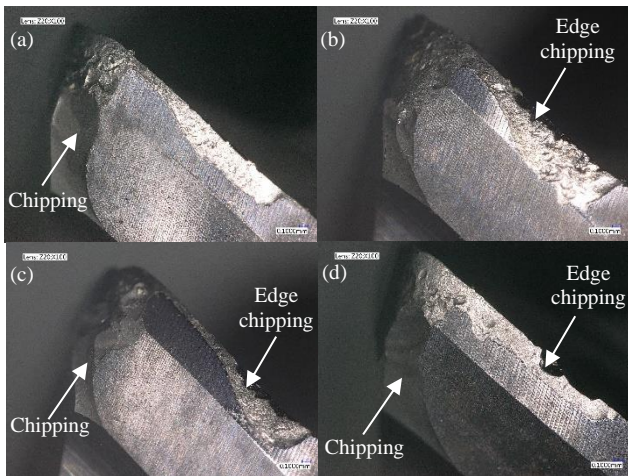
Post-machining tool wear at 60 m/min for (a) 8° rake angle (teeth 1); (b) 8° (teeth 2); (c) 10° rake angle; (d) 12° rake angle
